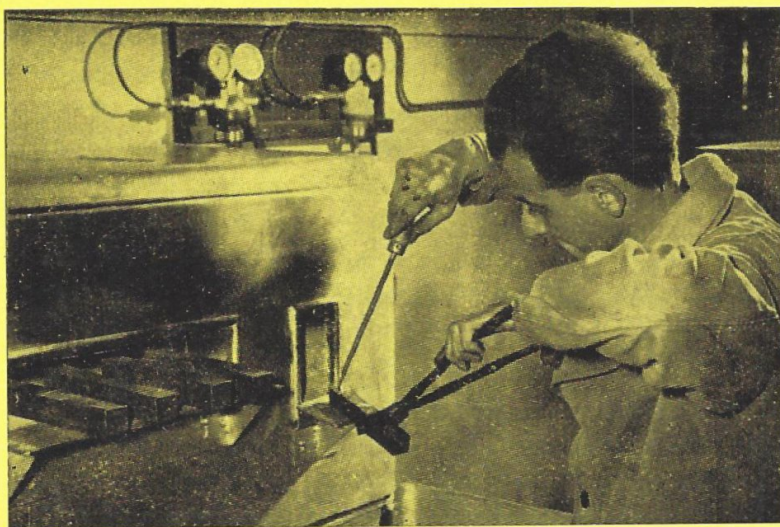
The appliances for brazing »Velebit« tool tips on the shank
